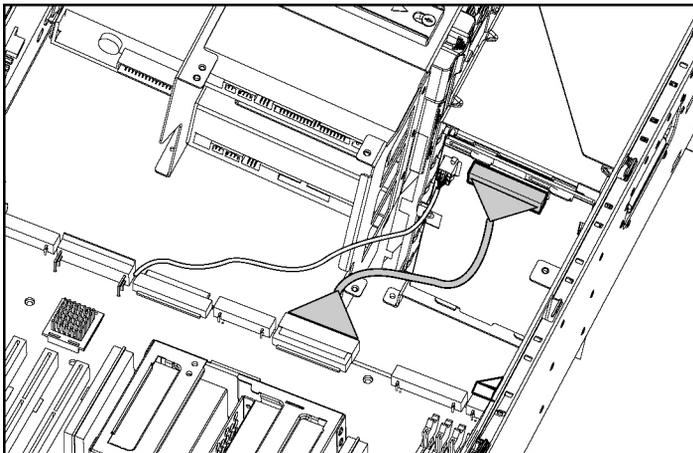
Cabling the SCSI hard drive cage to SCSI port 1 (center wall and PPMs removed for clarity)
